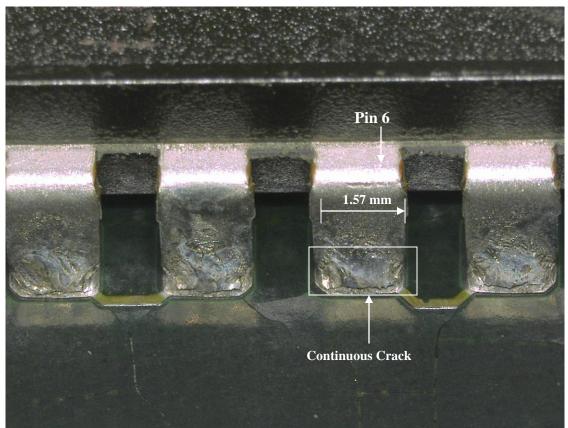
PWB 191 - U63, Pins 4 – 7 (Component Side, Sn Finish)
